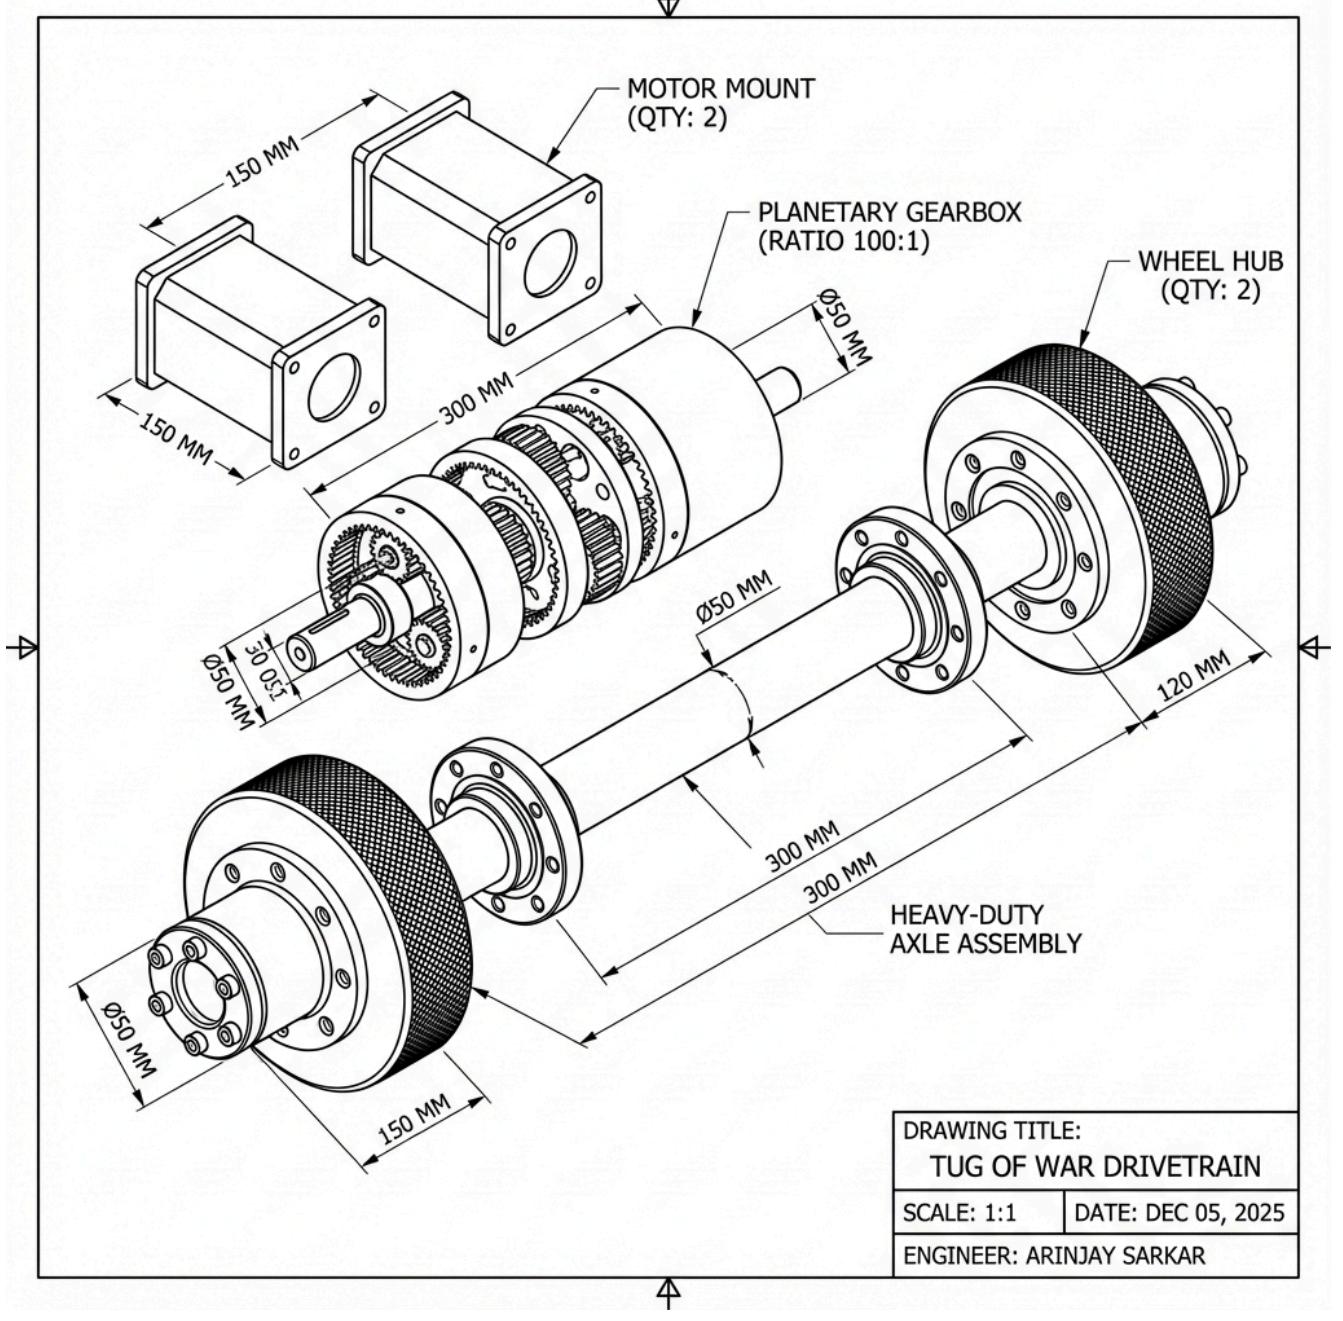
Drivetrain CAD — High-torque motor and gear assembly
